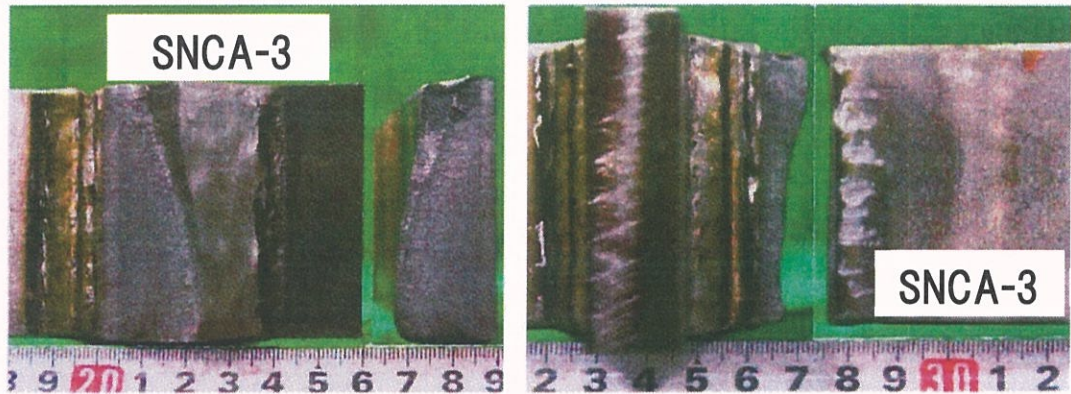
12 Fracture surface and pass after fatigue test
